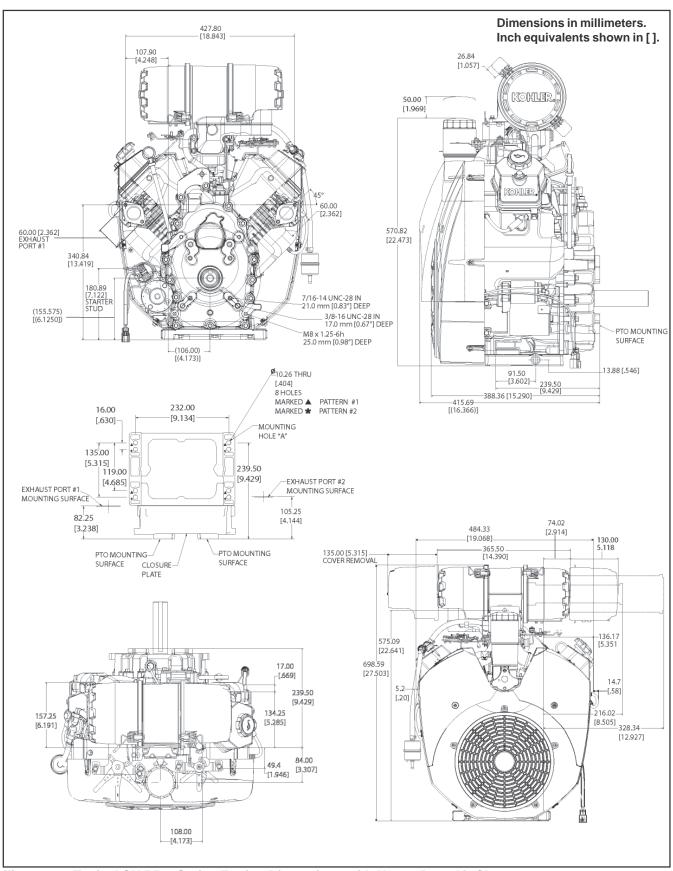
Typical CH PRO Series Engine Dimensions with Heavy-Duty Air Cleaner.
